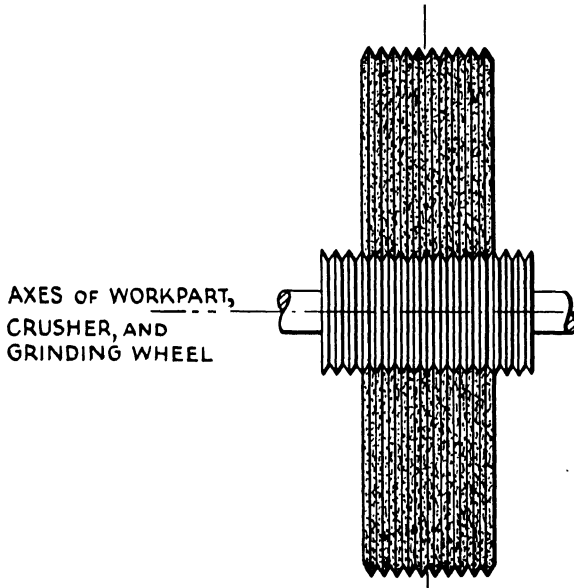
AXES OF WHEEL, CRUSHER, AND WORKPART IN SAME PLANE
